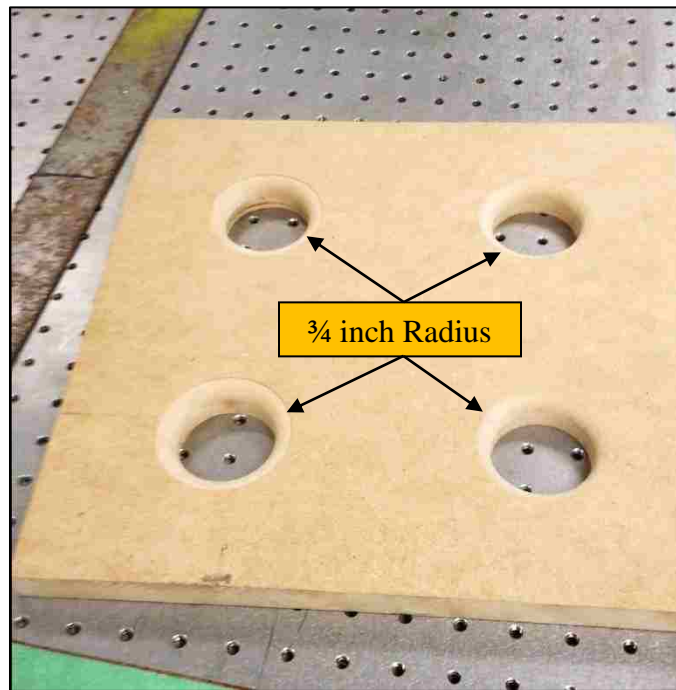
Divider Board Inlet Entrance to Vacuum Motors
